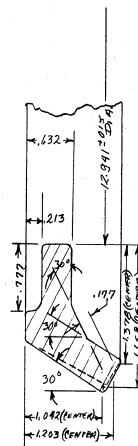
P/N 227594 - Rear Flange, Turbine Stator Blade Support Assembly, Material Ti-A 110-AT.
